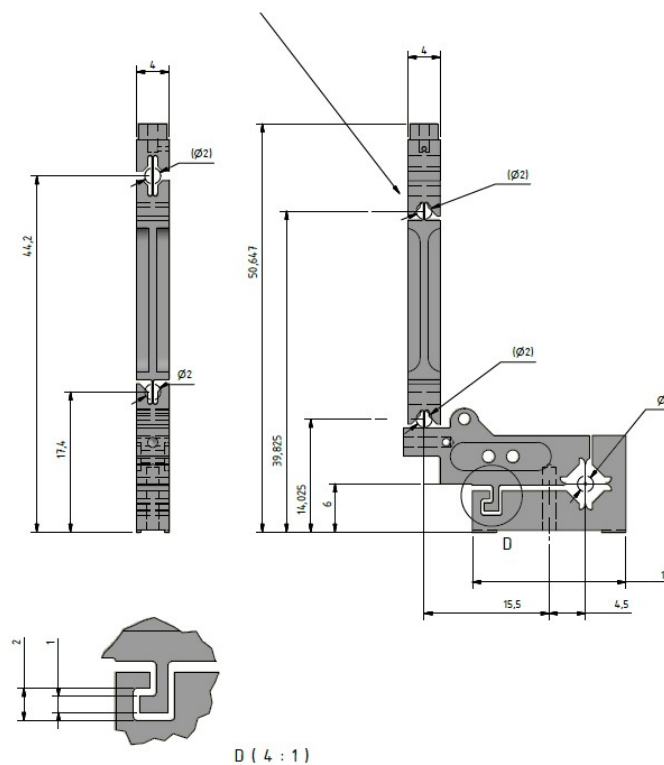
Technical drawing, by Harmen van der Meer, of the hexapod joints and the leg displacement mechanism.
